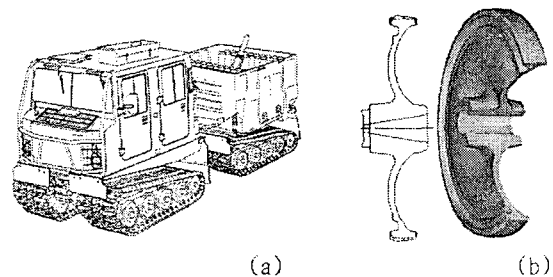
Road wheel shape(b) of a multipurpose tactical car(a)
